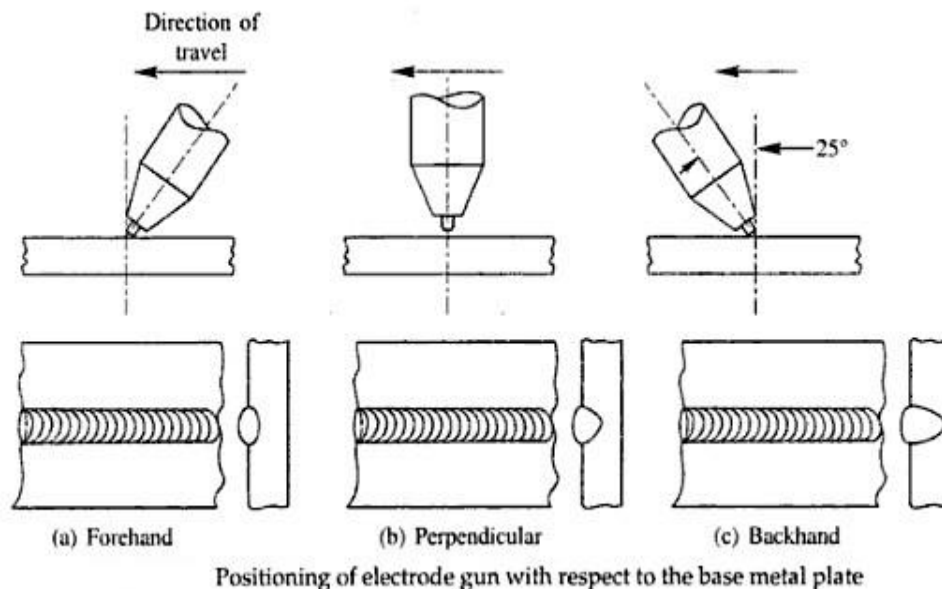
Different welding technique [<http://www.zirconium-tungsten-electrode.com>]
